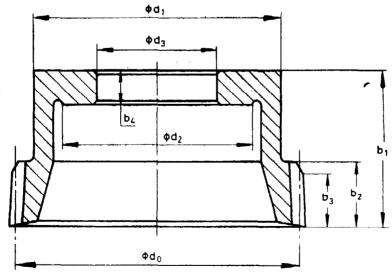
DIMENSIONS FOR HUB Type GEAR SHAPER CUTTER
